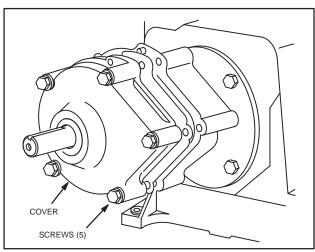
DRAINING GEAR REDUCTION AND REMOVING COVER
